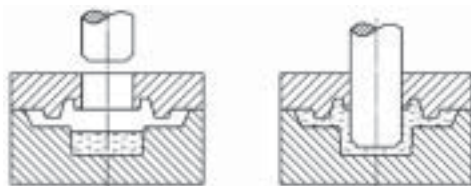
Sketch of indirect squeeze casting method (upward squeeze)
